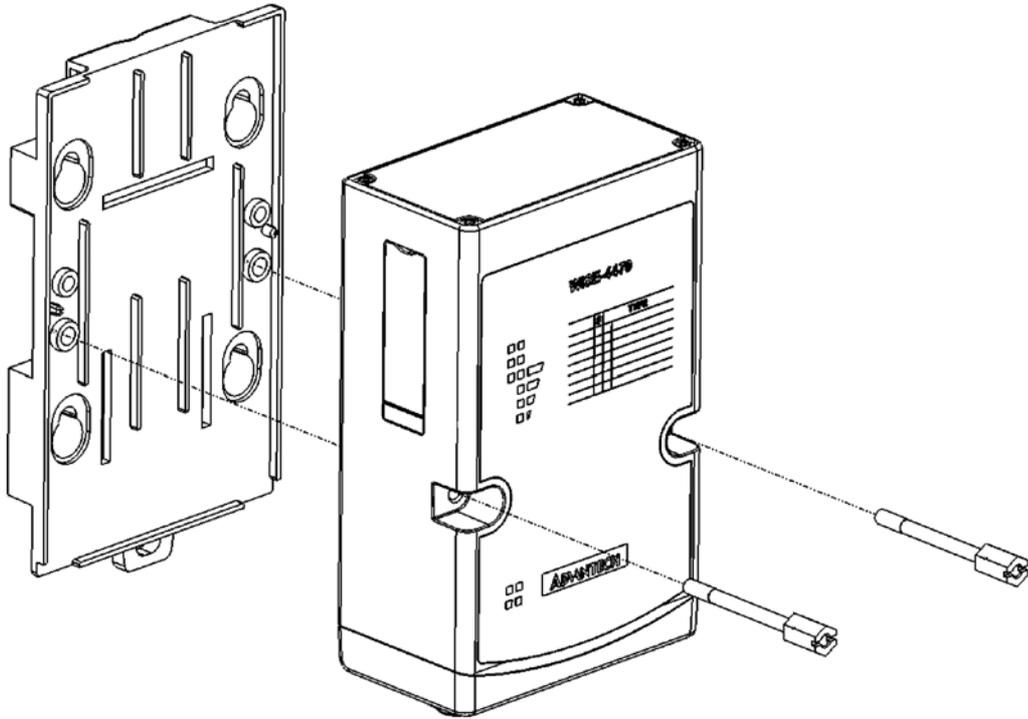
WISE-4470 DIN-rail Mounting Installation
